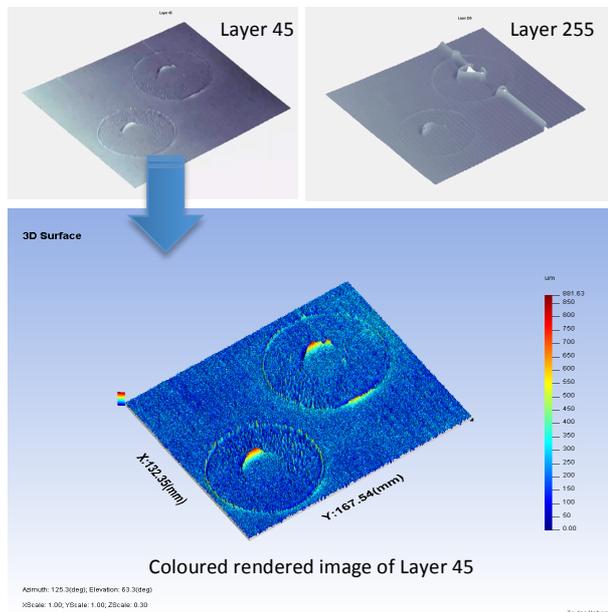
In-process captured images of 3D printed parts layer 45 and layer 255
